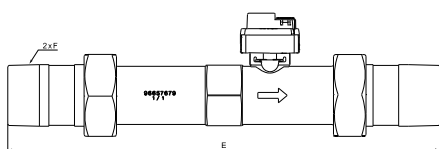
Dimensions, MFS 40-400 l/min, with adapters
